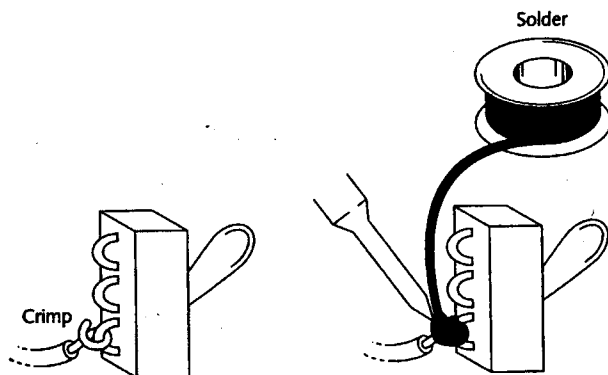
First crimp wire, then solder. Clip away any excess wire.
